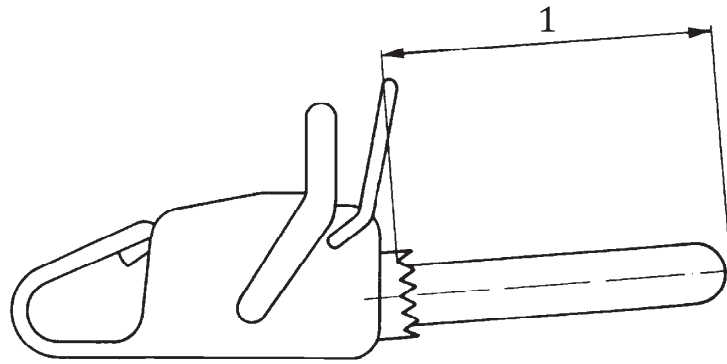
Cutting length — Saw with removable or no spiked bumper
